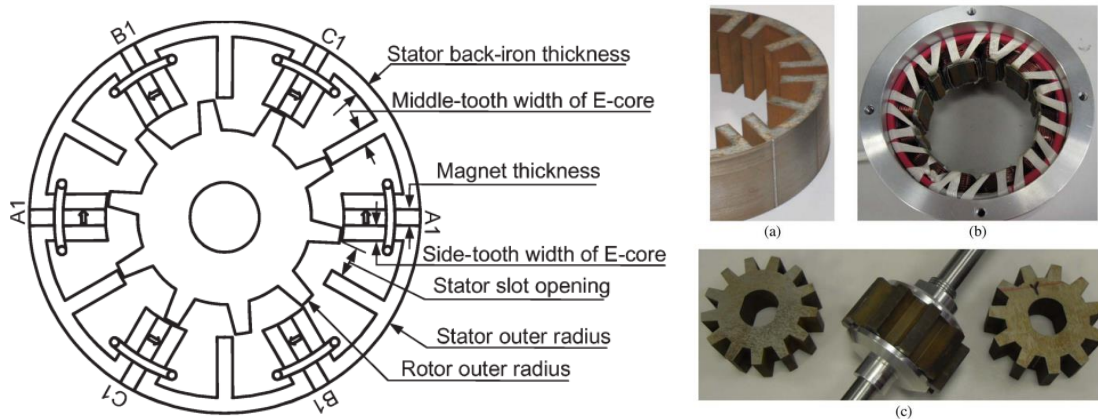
E-core flux-switching PM machine and one prototype [121].
